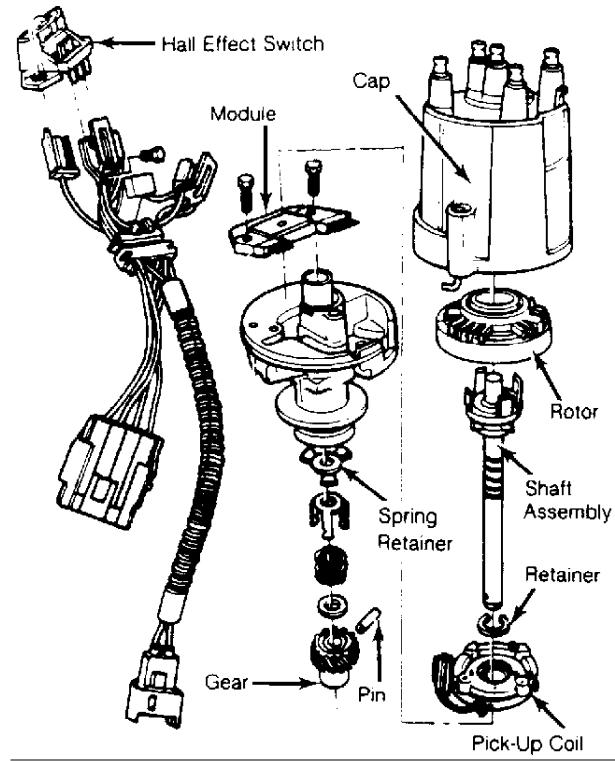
Exploded View of HEI Distributor Without Sealed Connector Courtesy of General Motors Corp.
